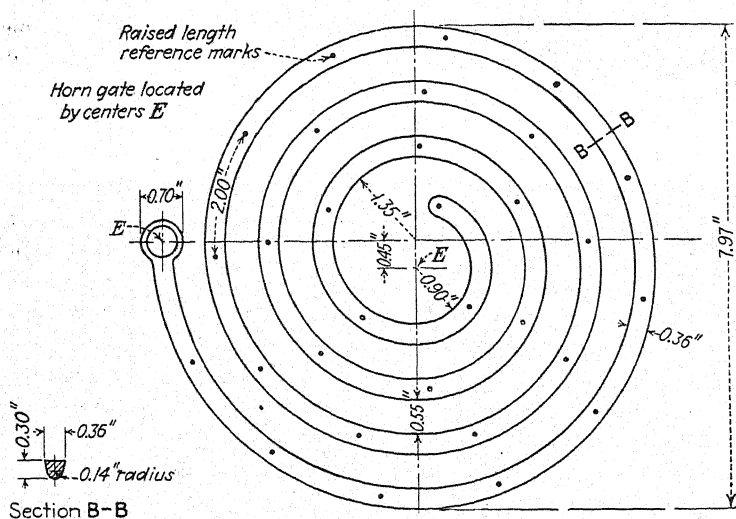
Dimensions of the spiral shown in Fig. 81. (Saeger and Krynitsky.⁽⁴⁸⁶⁾)
